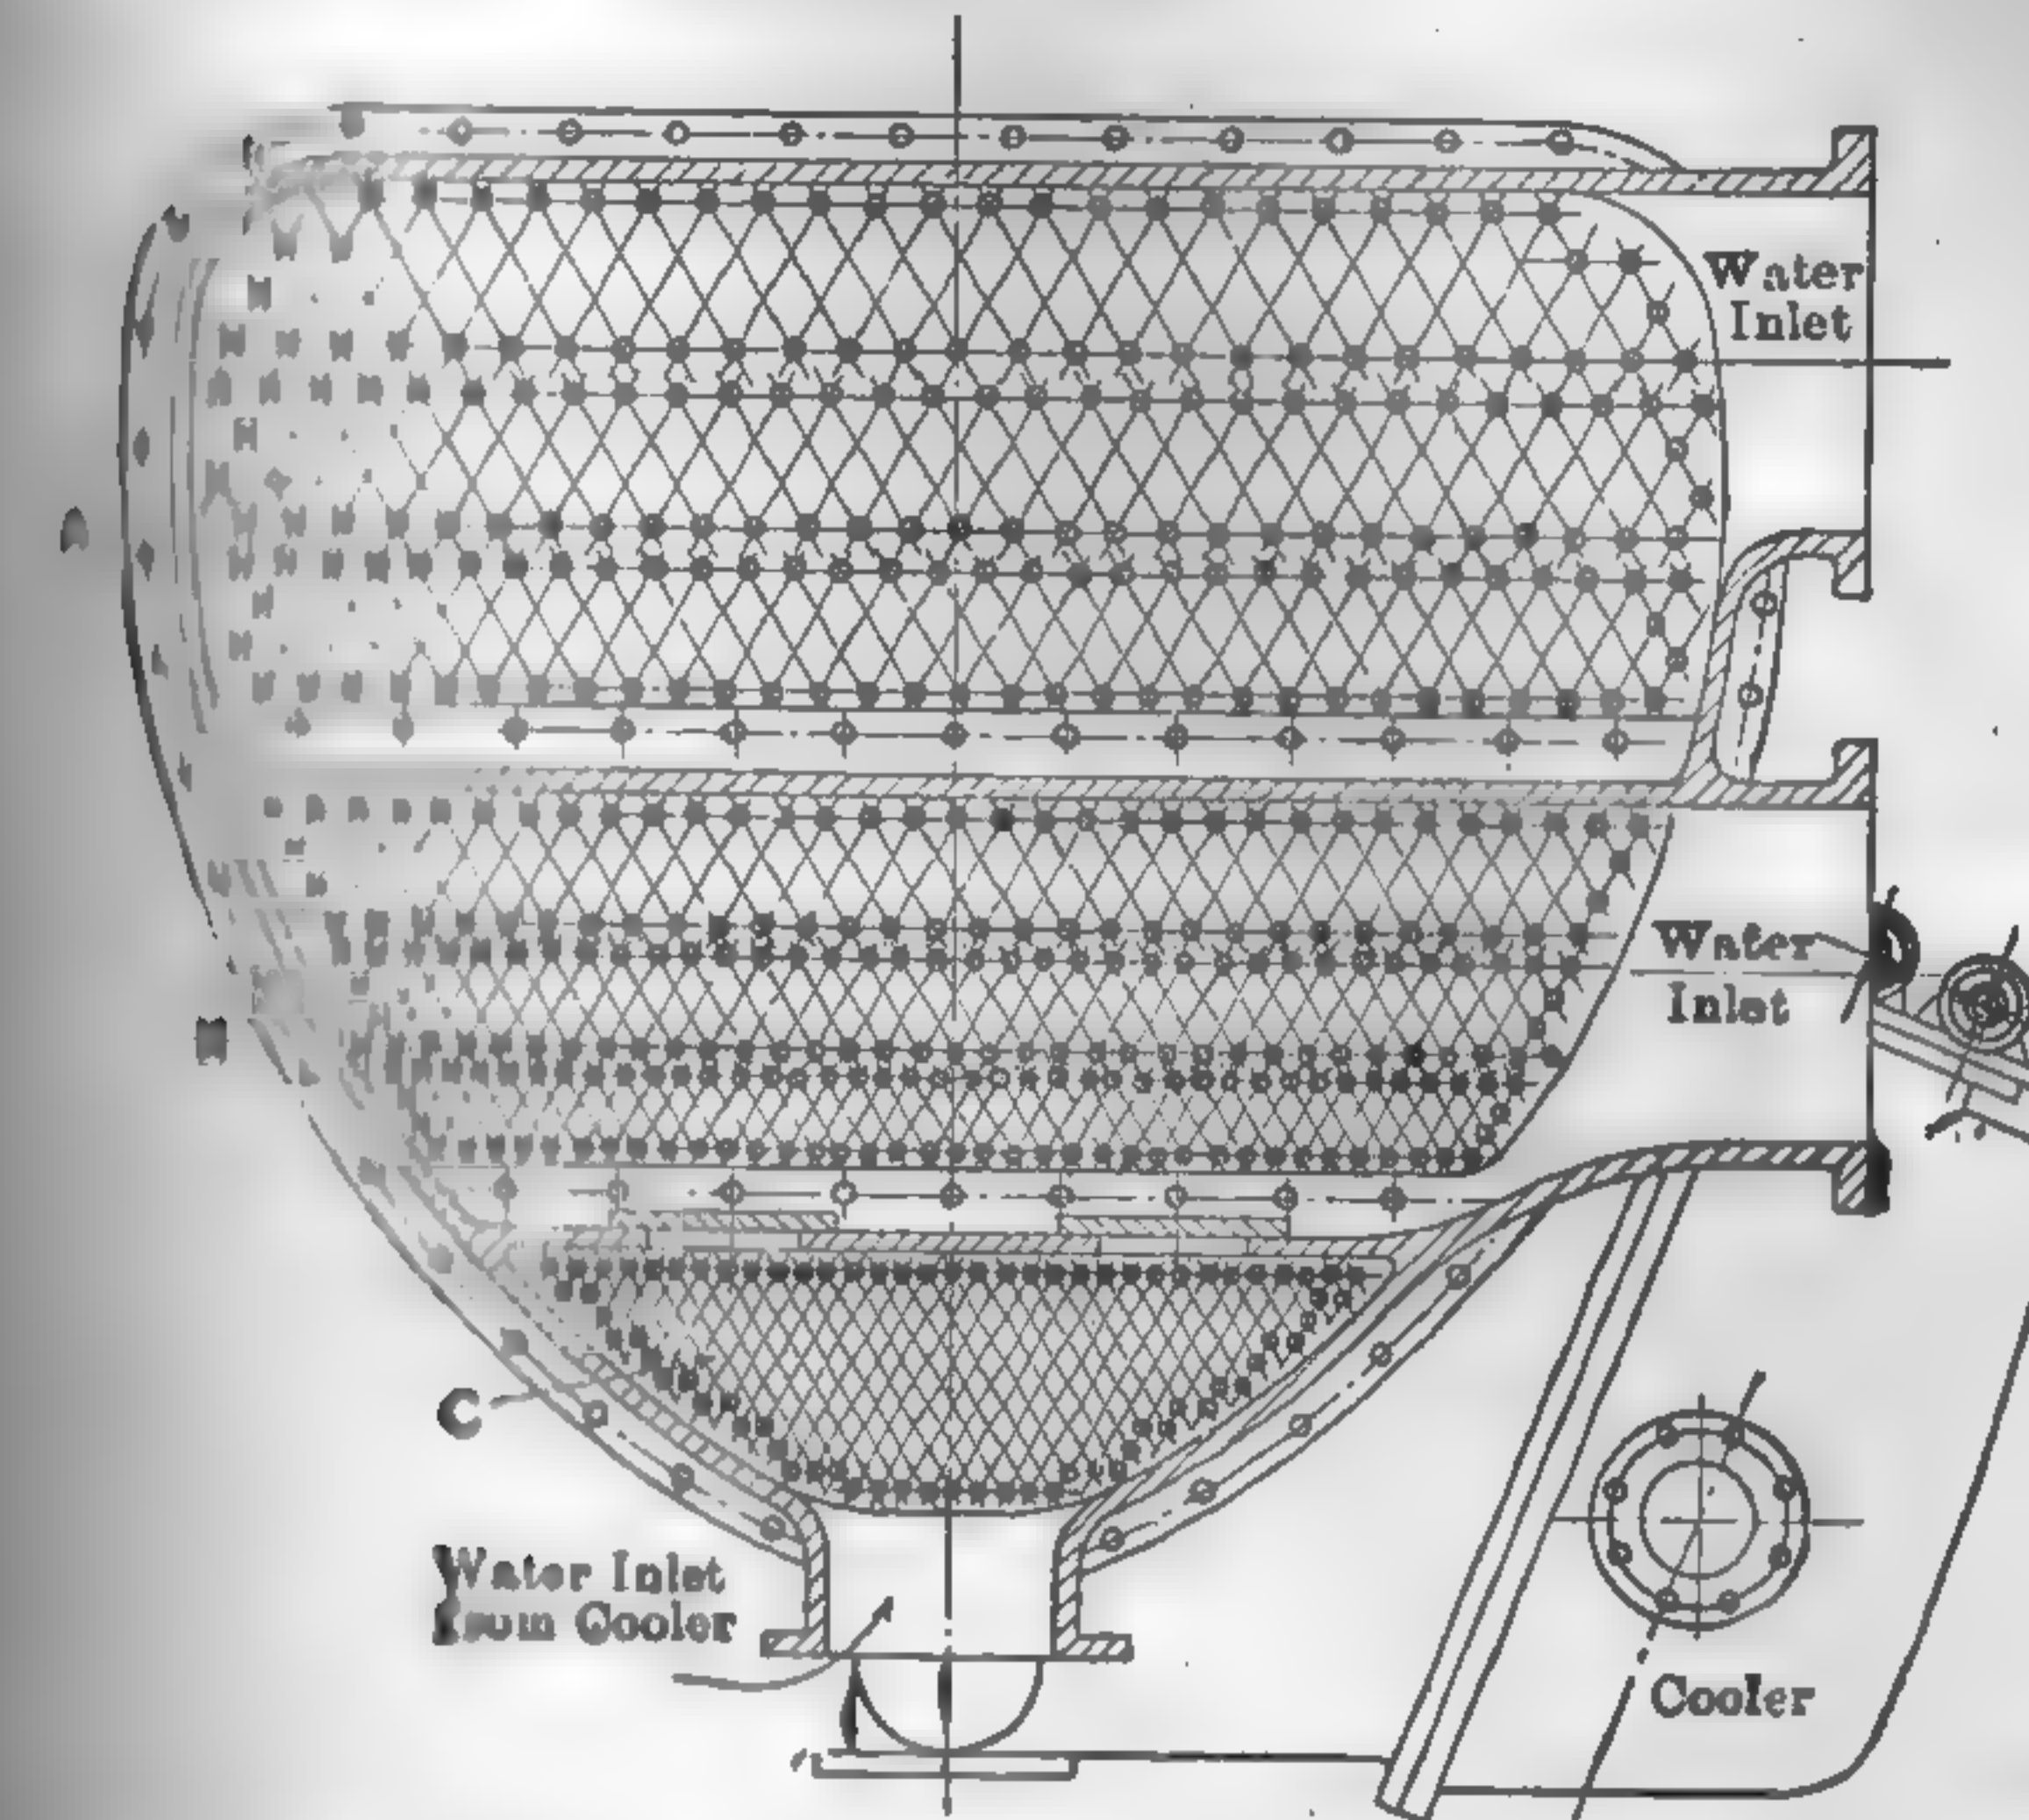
Tube Sheet — Ingersoll-Rand Condenser.
